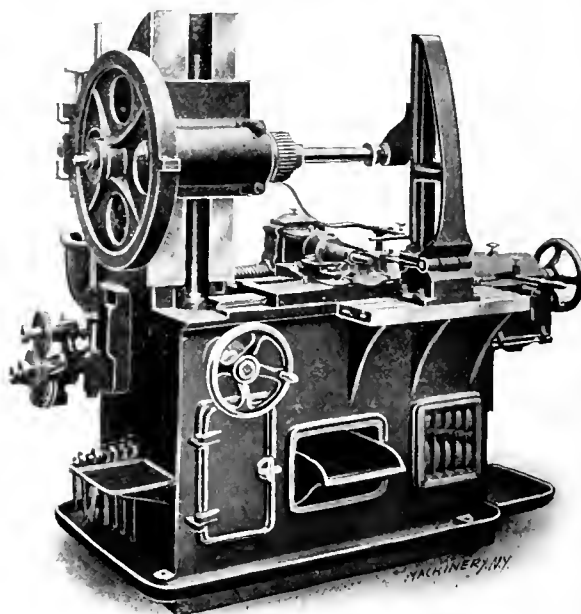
The Reinecker Automatic Spur Gear Cutting Machine.
